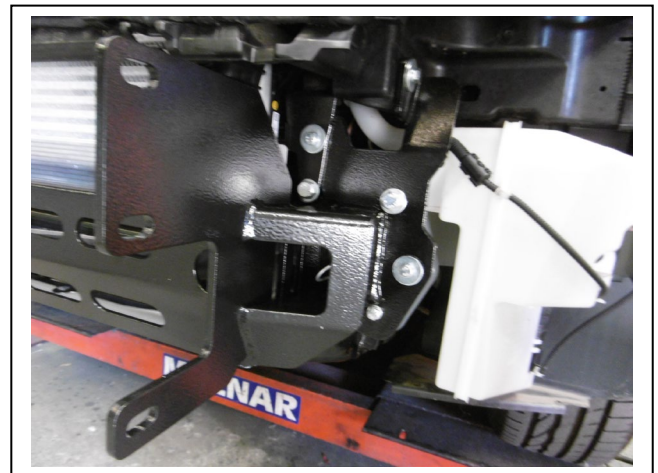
Bumper support attached to vehicle. Passengers side shown.
